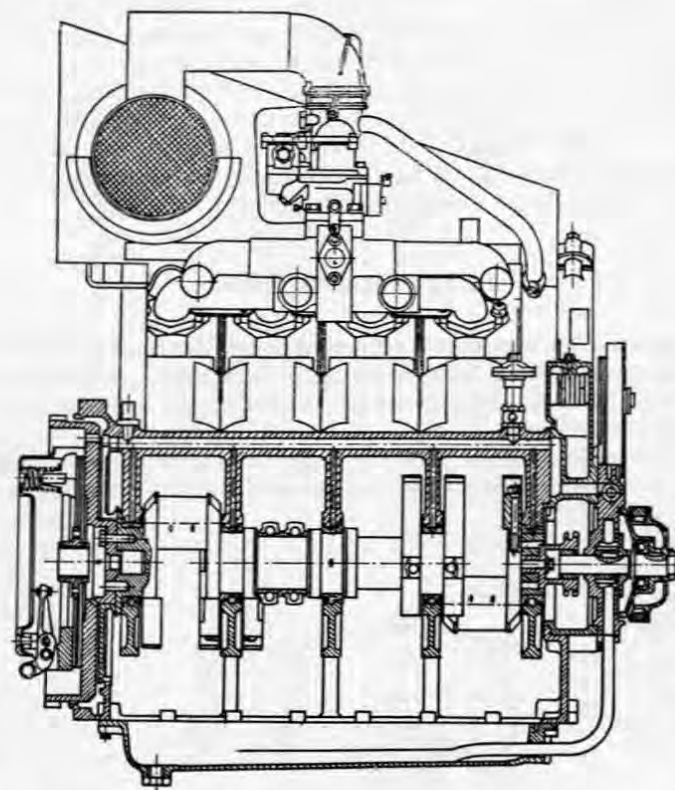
Longitudinal section of the eight-cylinder Tatra 87 engine.
